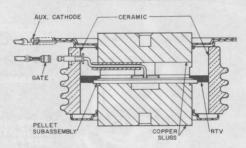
(b) INTERNAL CONSTRUCTION DETAILS
